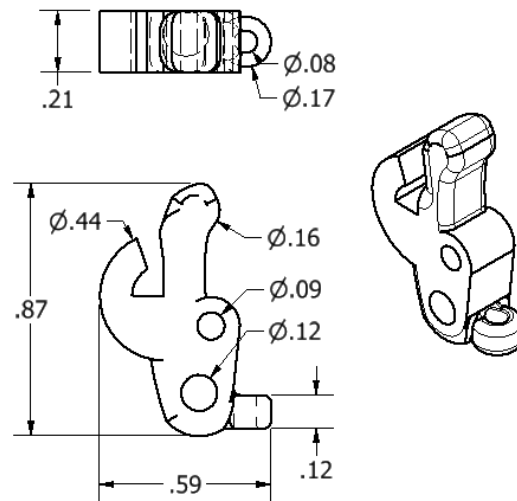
Short gripper for Mark 1 grabber. Dimensions in inches.
